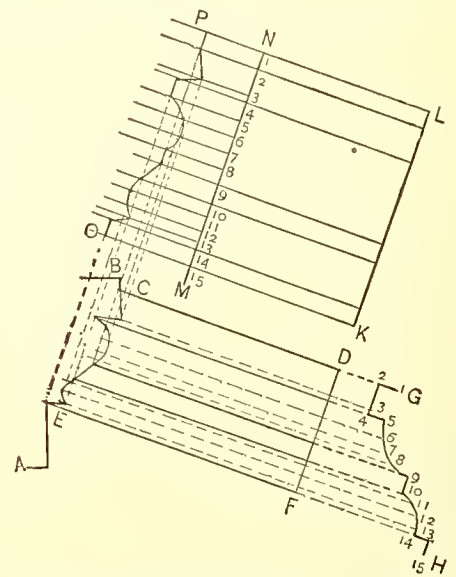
A Butt Miter against an Irregular or Molded Surface.
